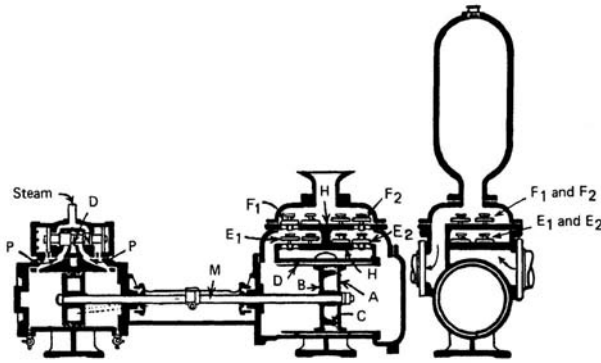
Double-acting steam-driven reciprocating pump.
